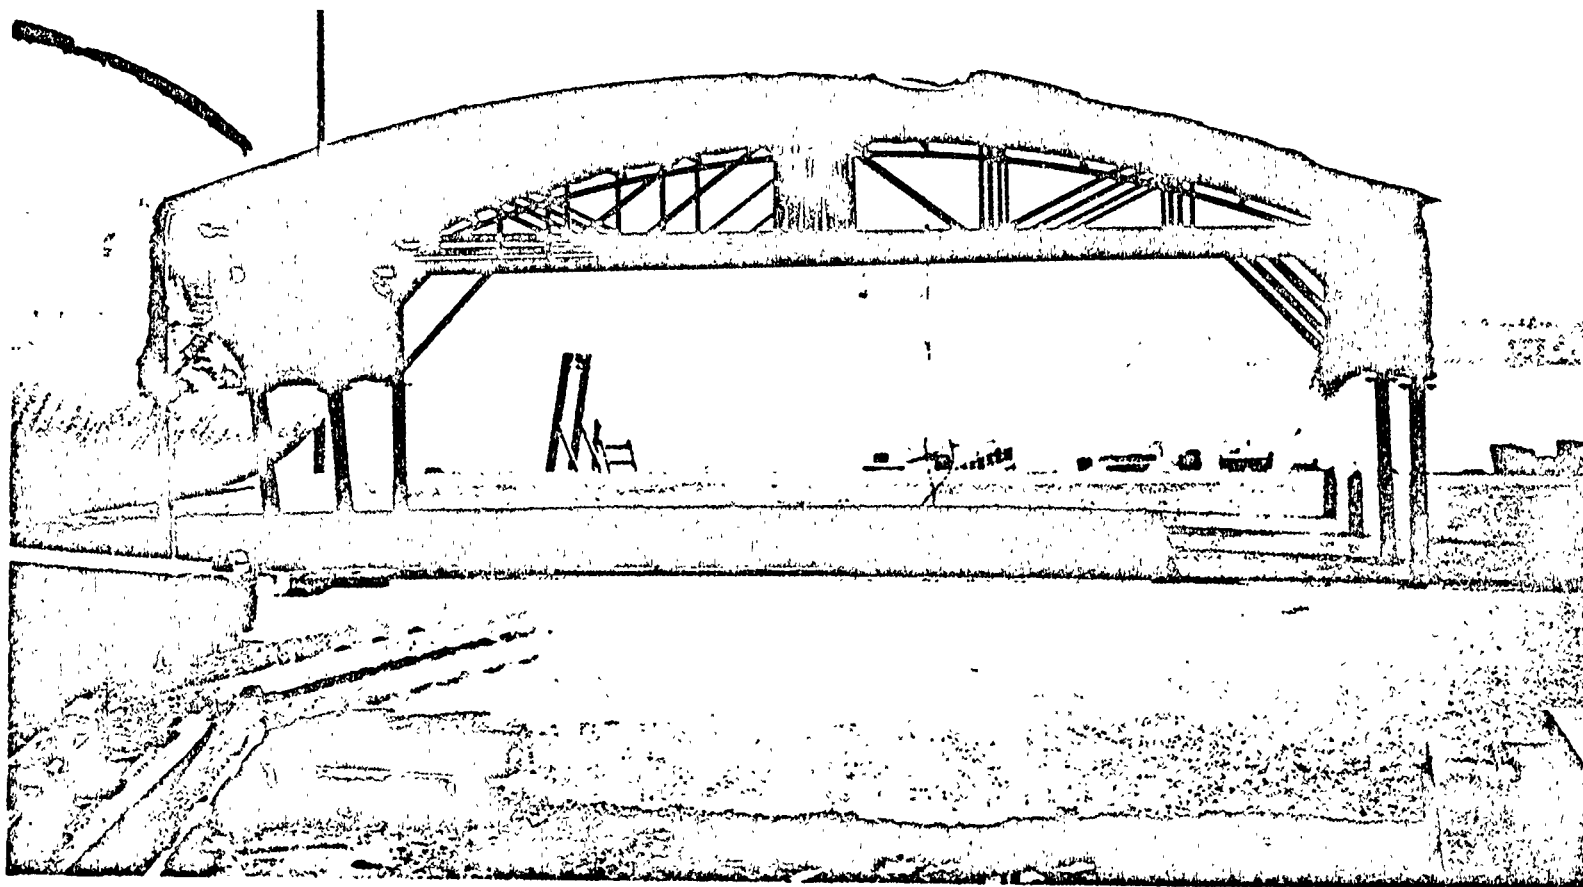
A portable steel shelter used to provide rain protection and shade for shipyard work either on the ground or on the deck of a ship or barge. Courtesy of FMC, Marine and Rail Equipment Division, Portland, Oregon.
